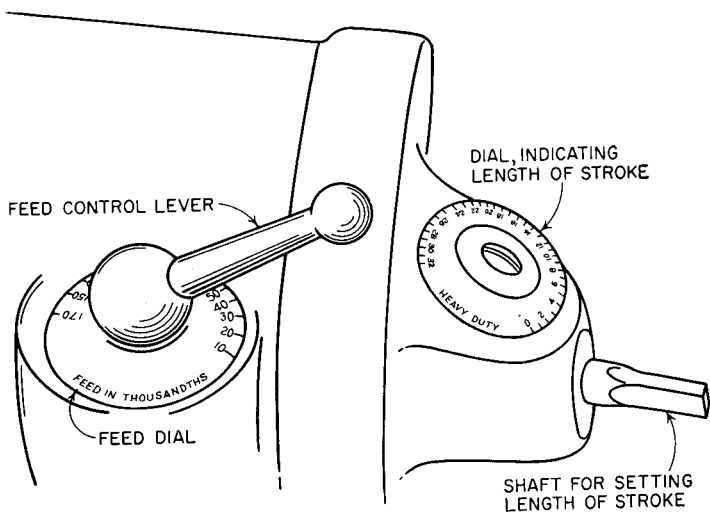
Cincinnati stroke-adjusting shaft and feed dial. (The Cincinnati Shaper Company)
